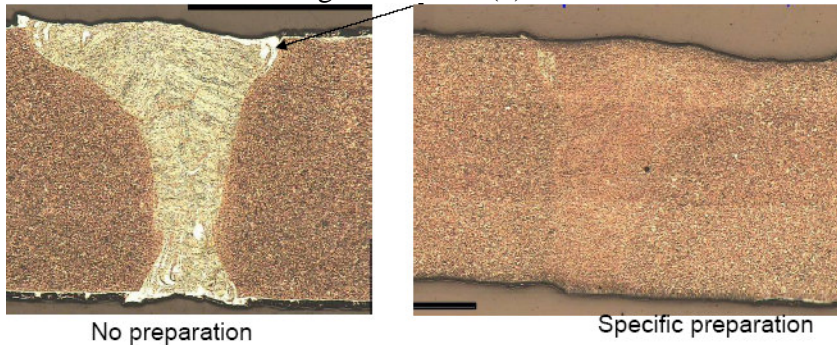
Conventional laser welding of TWB's with and without removal of AlSi coating
